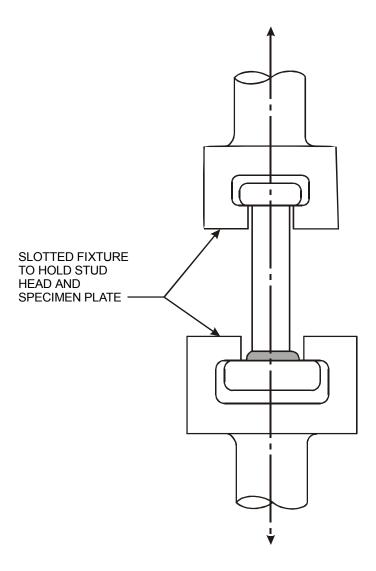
Stud Weld Tension Test Fixture (see D5)
